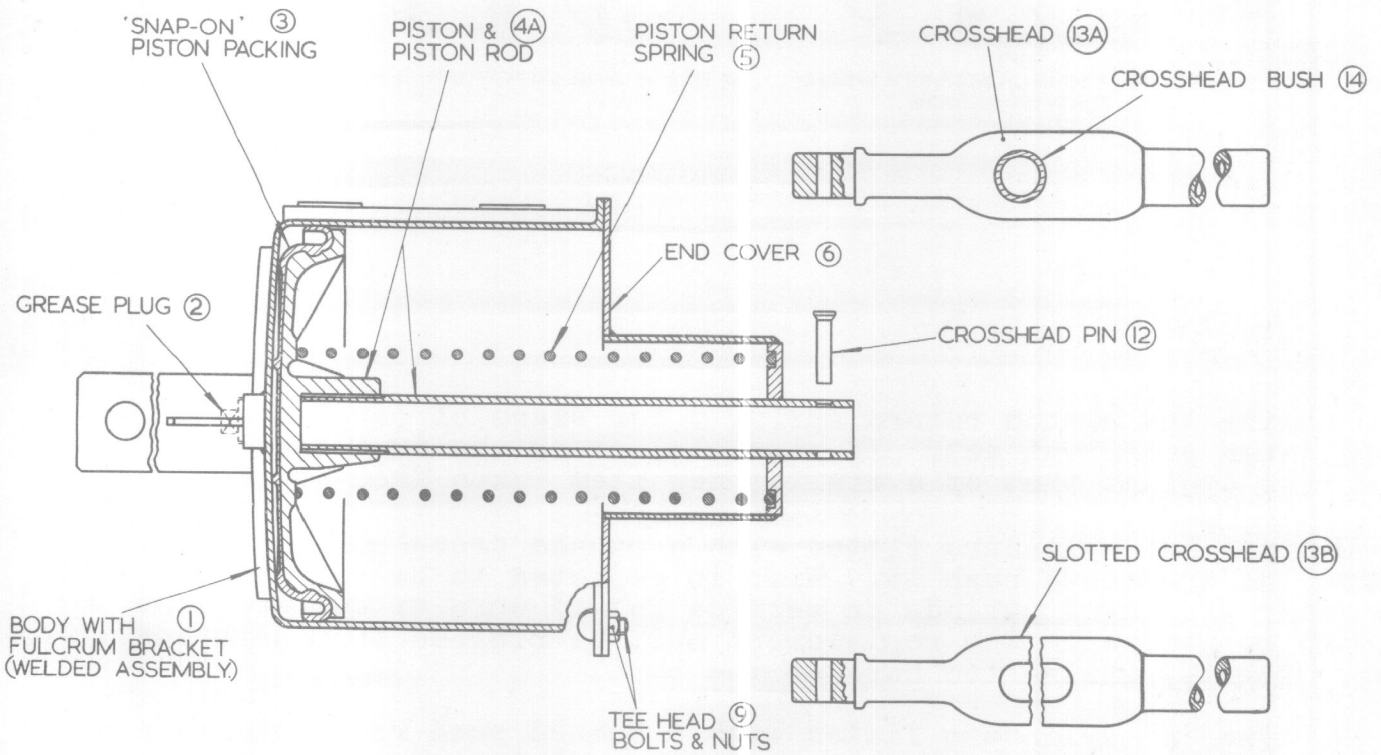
BRAKE CYLINDER TYPE H.F. WITH CROSSHEADS. (FULCRUM BRACKET INTEGRAL WITH CYLINDER BODY)
